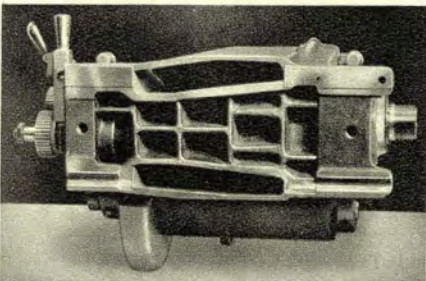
Bottom View of Headstock Showing Rigid Cross-Ribbed Construction
